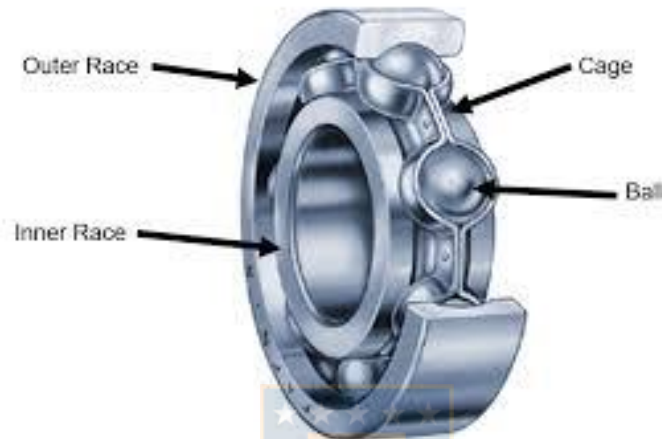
Parts of a ball bearing (source: [www.hecoinc.com])
